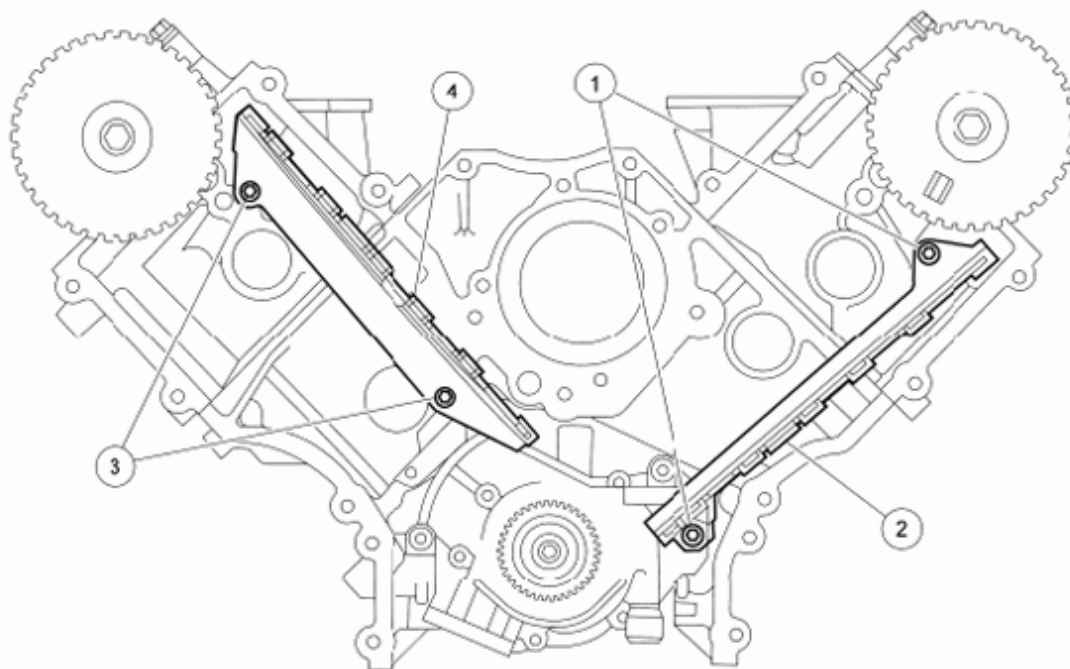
Identifying Timing Chain Tensioner Arms And Bolts
